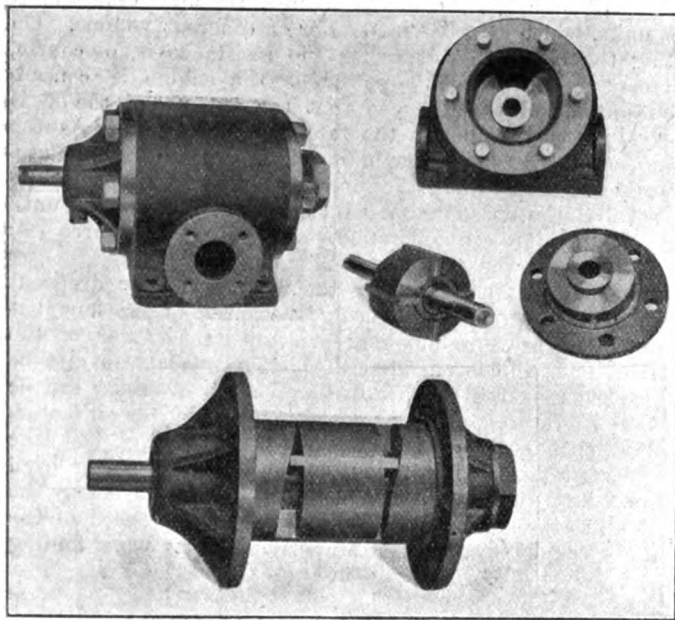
General and Detail Views of Pittler Oil Compressor.
